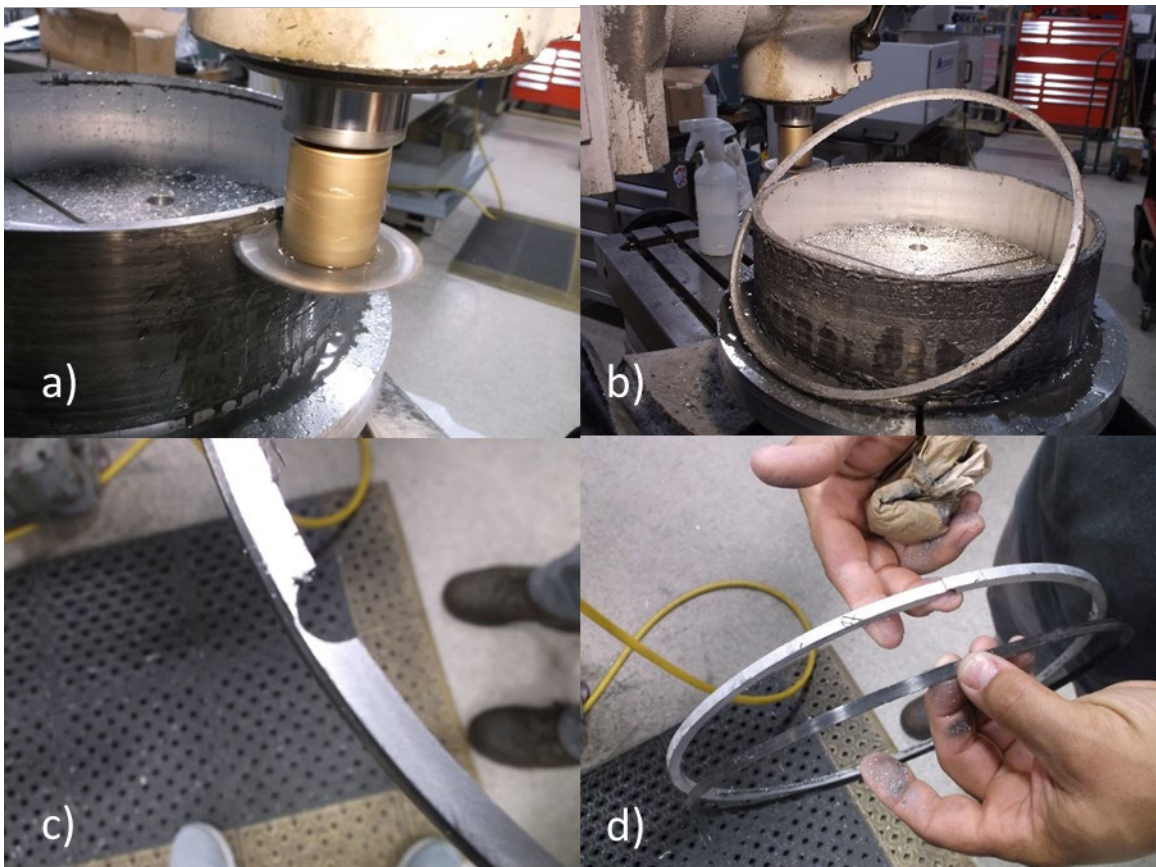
Removing aluminum liner wall to extract test specimen, including a) cutting cylinder and aluminum mandrel, c) drilling through aluminum substrate, and d) removing composite ring.
